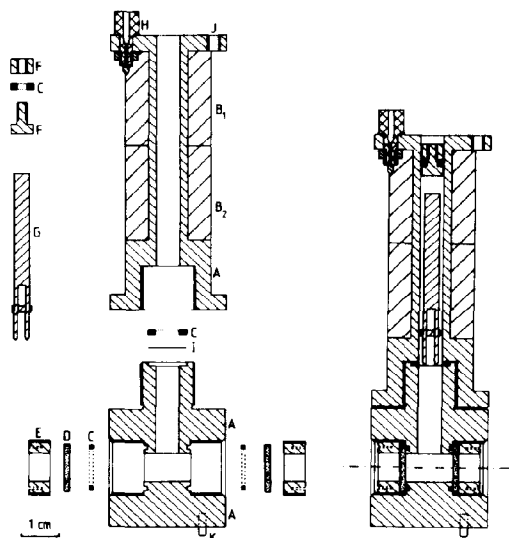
Detailed drawing of the rapid mixing system [62]: A, Kel-F body; B, two coils; C, Teflon ring; D, window; E, Kel-F ring; F, Kel-F adjustable piston; G, soft-iron mixing bar; H, electrical connector; I, membrane; J, port for inserting rod; K, positioning pin.
